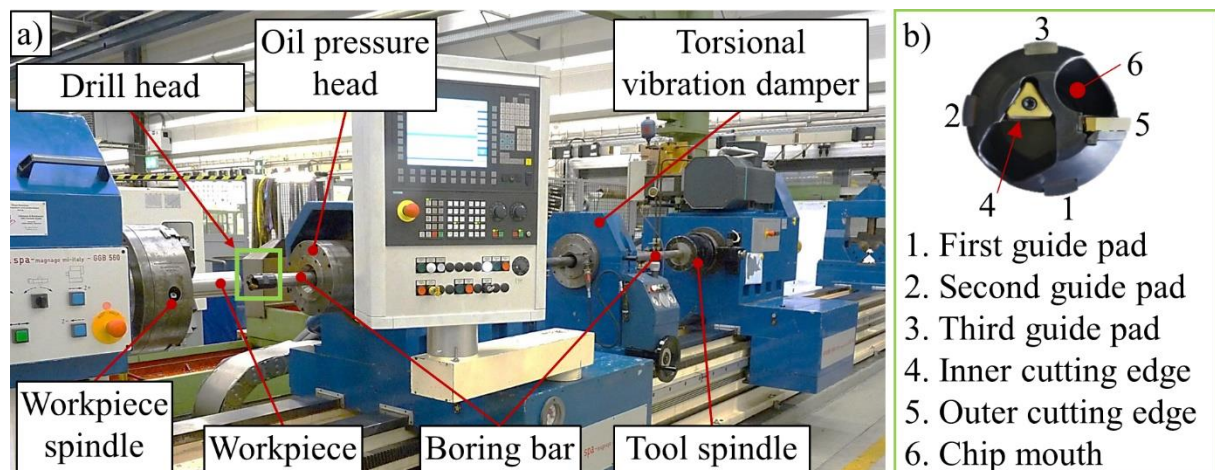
Setup employed for BTA deep hole drilling: a) Giana GBB 560, b) BTA drill head [10]
